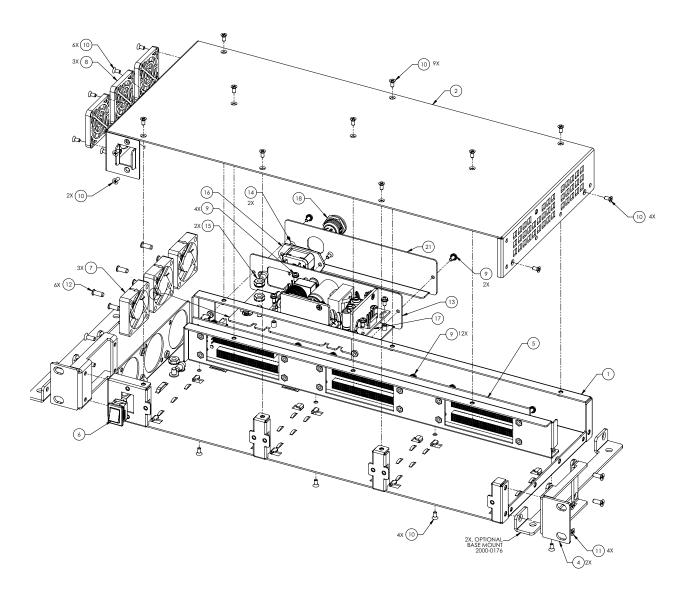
Typical FLATRACK Enclosure (Exploded View)
